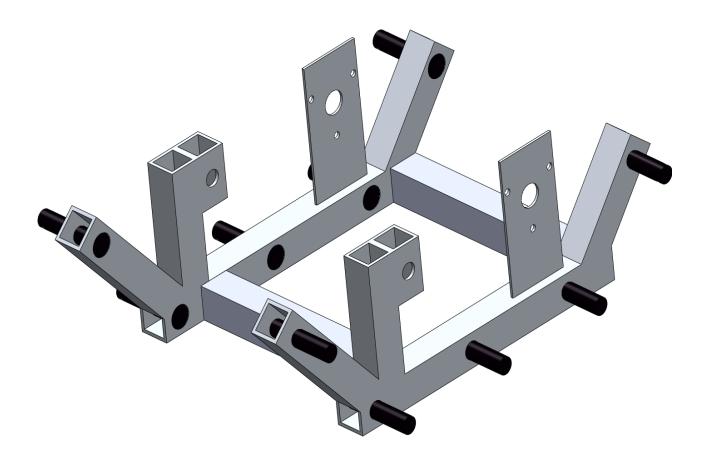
Solid model of the final chassis assembly showing the motor mounts and track tensioners in position.
